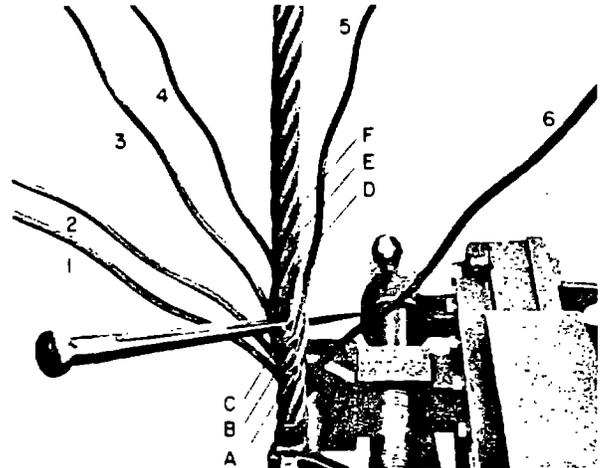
Opening the Long Part of the Rope for the First Forming Tuck.
